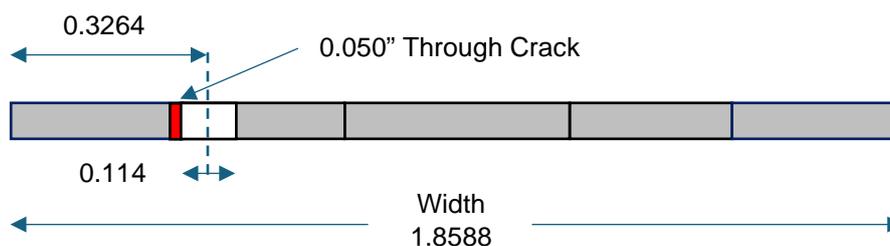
Fatigue Model for Initial Crack at Screw Hole at Inner Edge of Bulb
